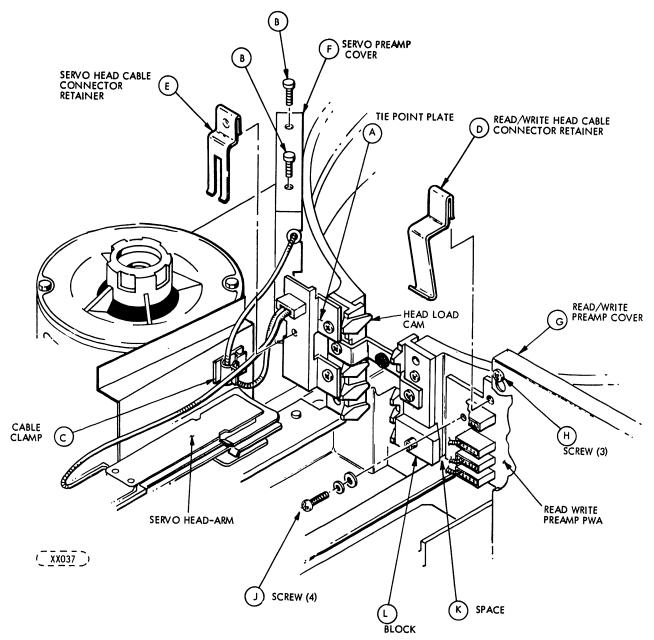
SERVO HEAD/ARM ASSEMBLY
